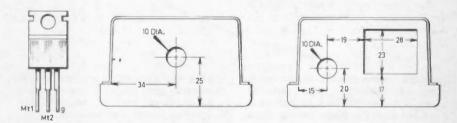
Drilling and cut-out details of the case and the pin configuration of the triac CSR1.
